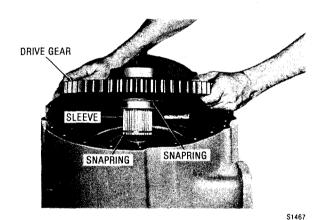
Installing transfer drive gear assembly (TRT-1)
